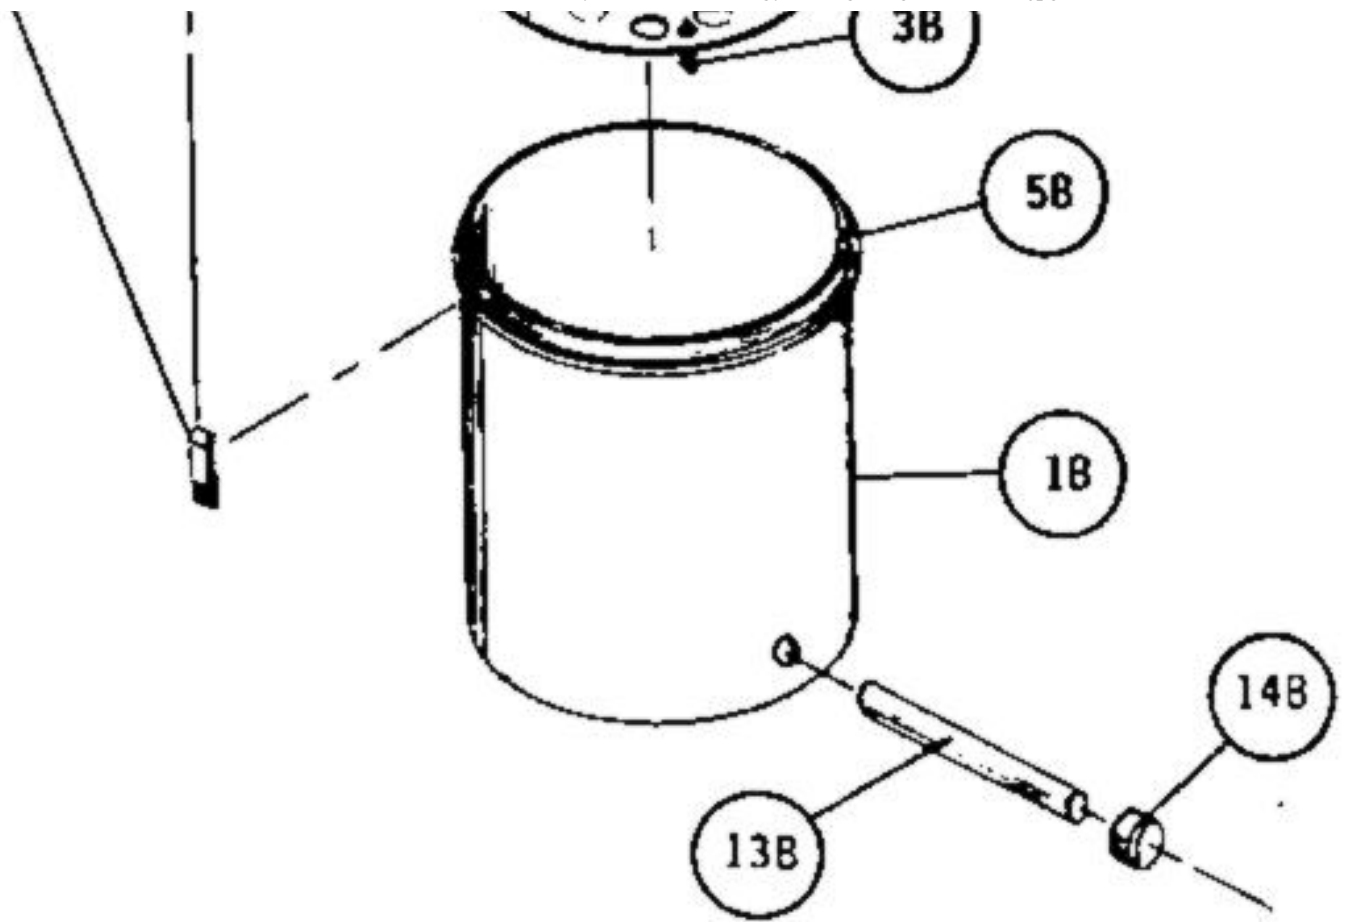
Exploded, schematic diagram of the filter unit.
